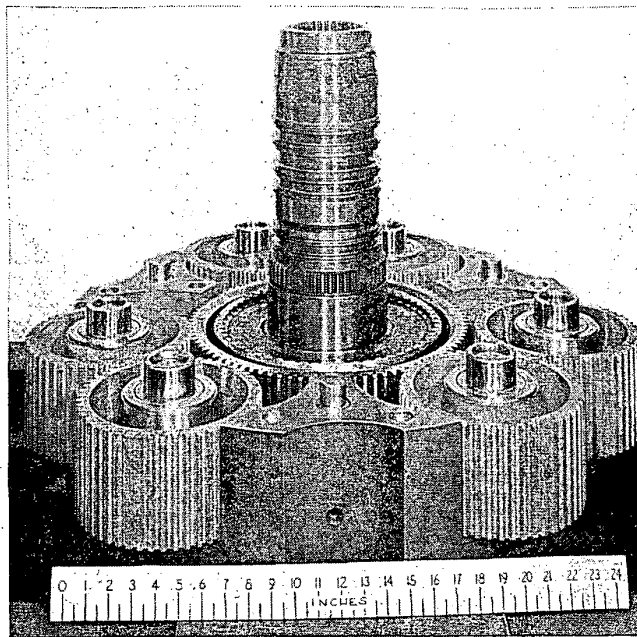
Sun, planets, and cage structure for unit shown in Fig. 3-41. (Courtesy of Jered Industries, Inc.)
